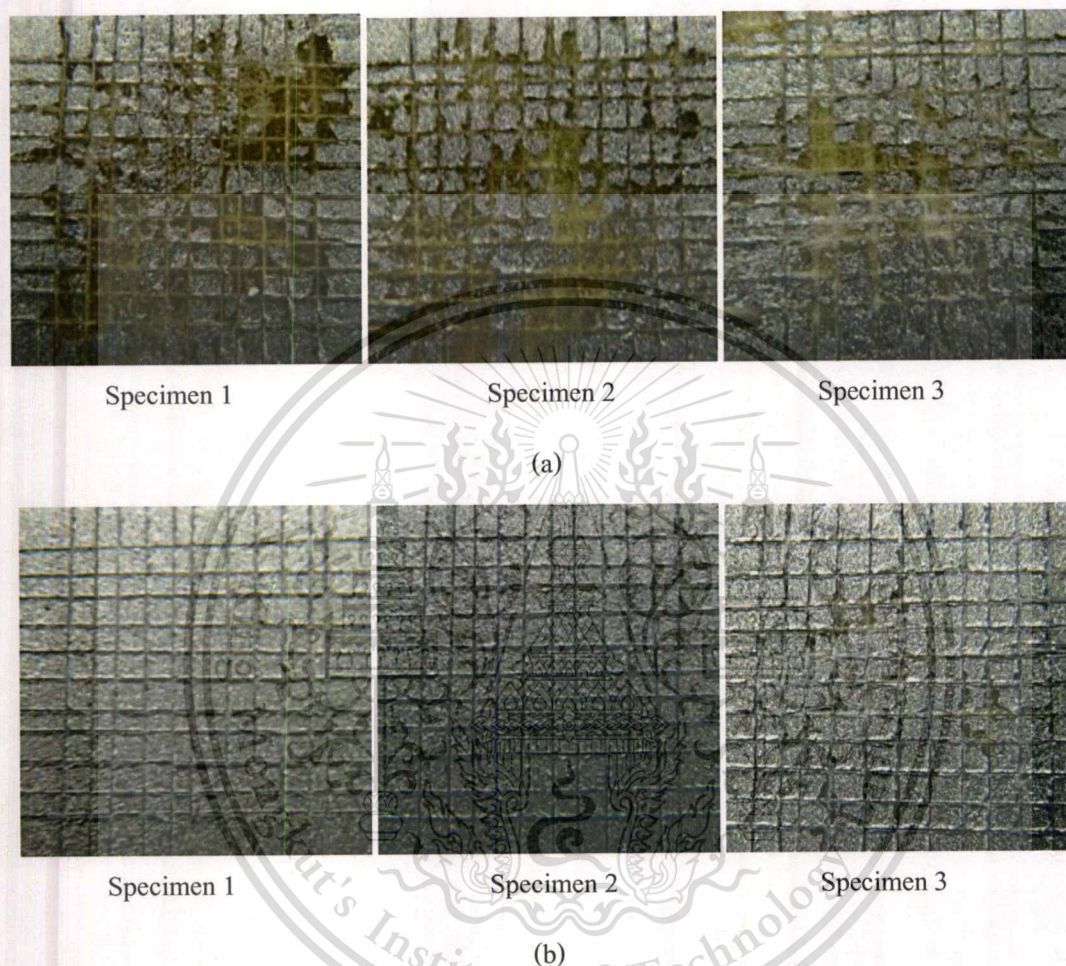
Polyurethane composites prepared by (a) conventional process, (b) in-mold coating process, after the ASTM D3359 cross cut test
